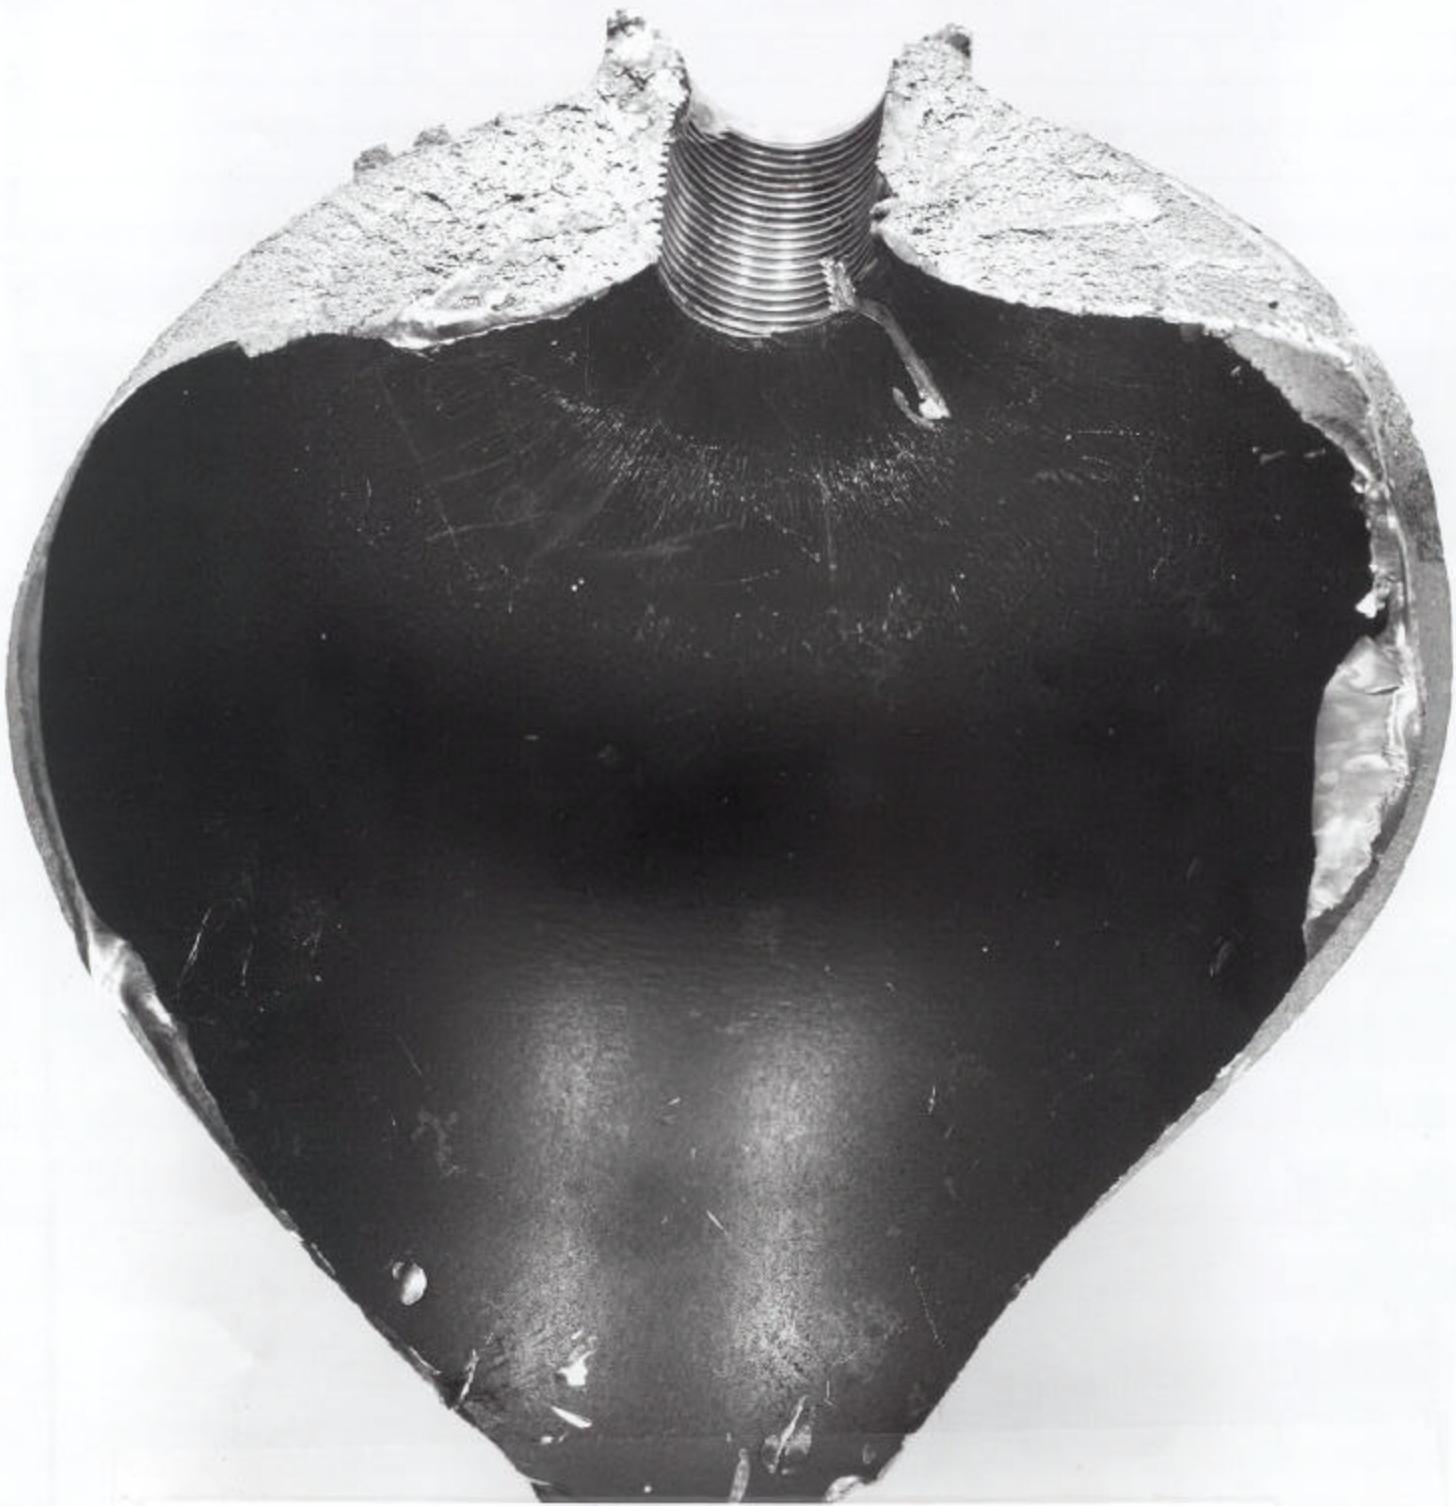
Piece of failed 6351-T6 aluminum cylinder used to obtain fracture toughness and tension specimens.
